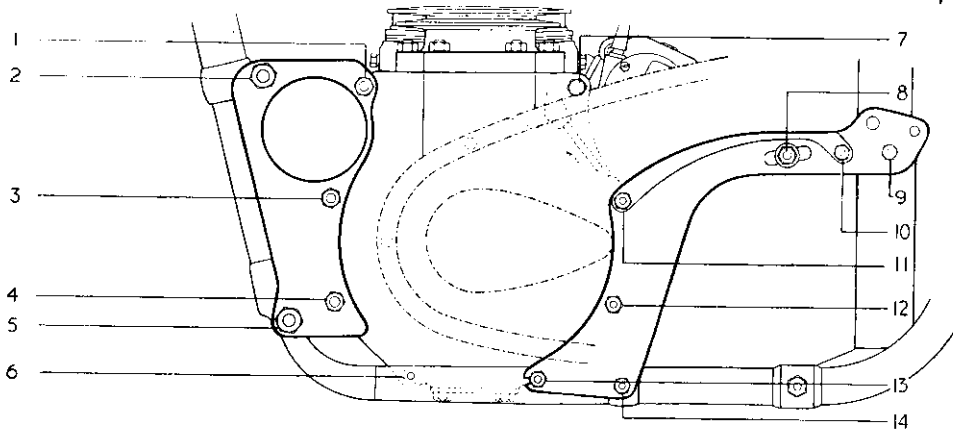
ENGINE PLATE—STUDS, BOLTS, NUTS AND WASHERS
